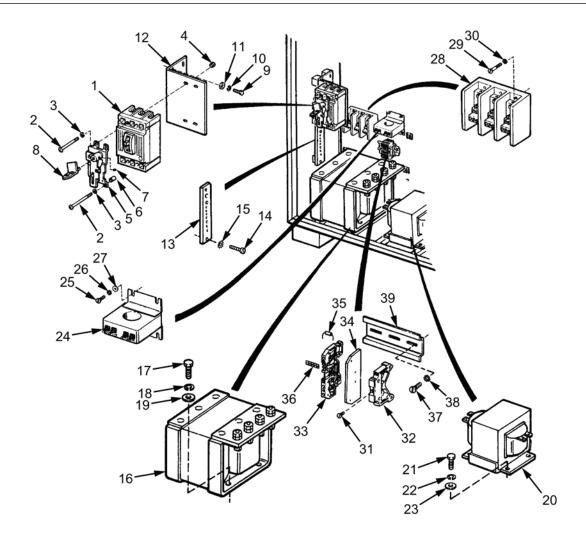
Main Control Panel, Lower Interior Panel (Sheet 1 of 2).
